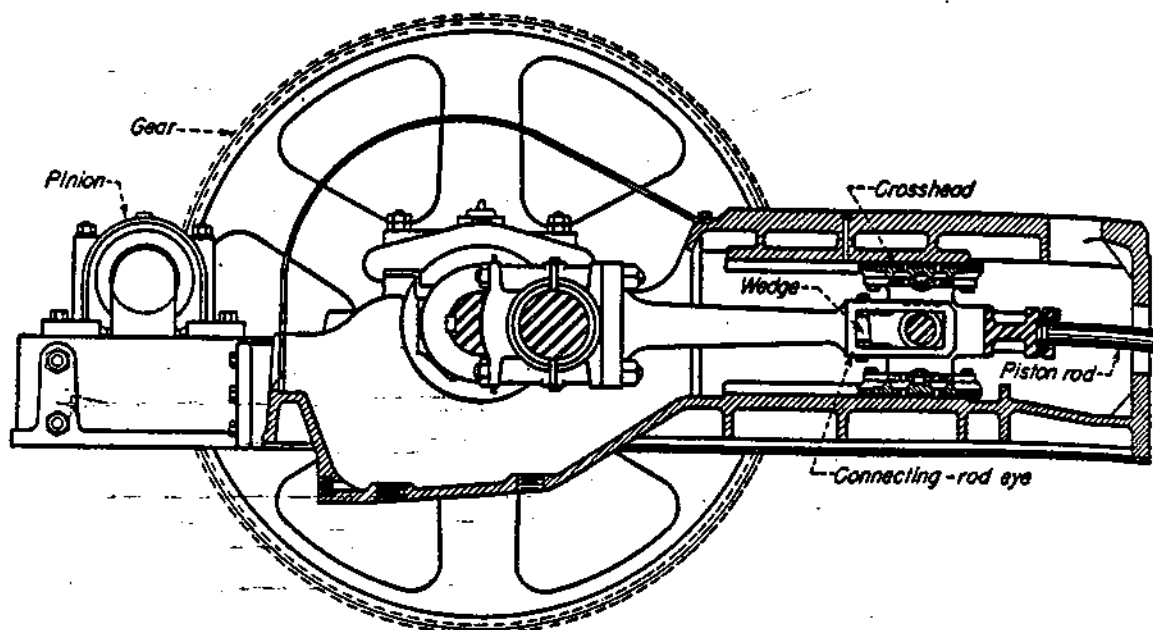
Large open-frame power end with separate adjustable crosshead shoes and adjustable crosshead-pin bearing.
